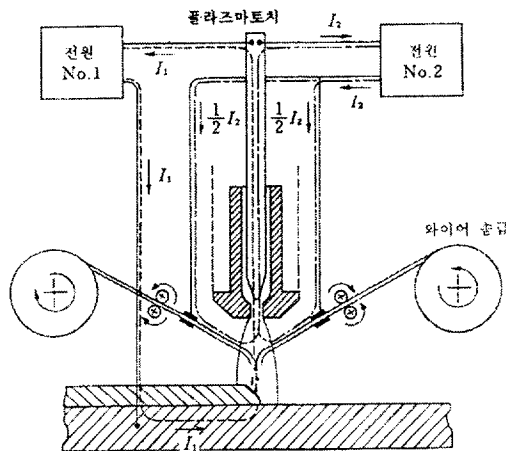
Schematic drawing of gas metal plasma arc welding
